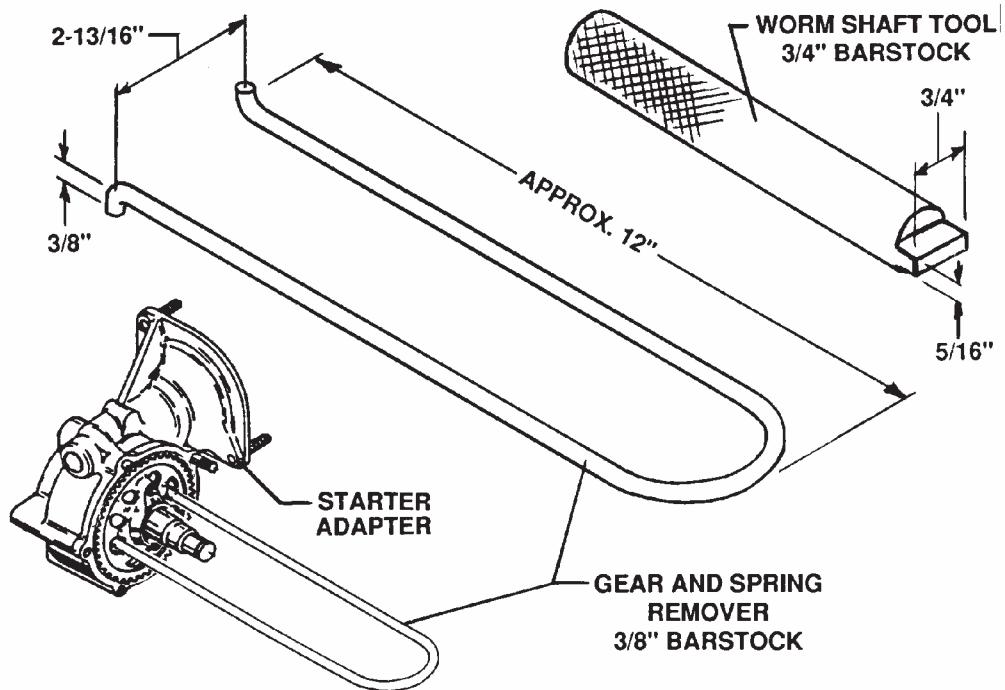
Worm Shaft Tool and Starter Adapter Disassembly Tool
